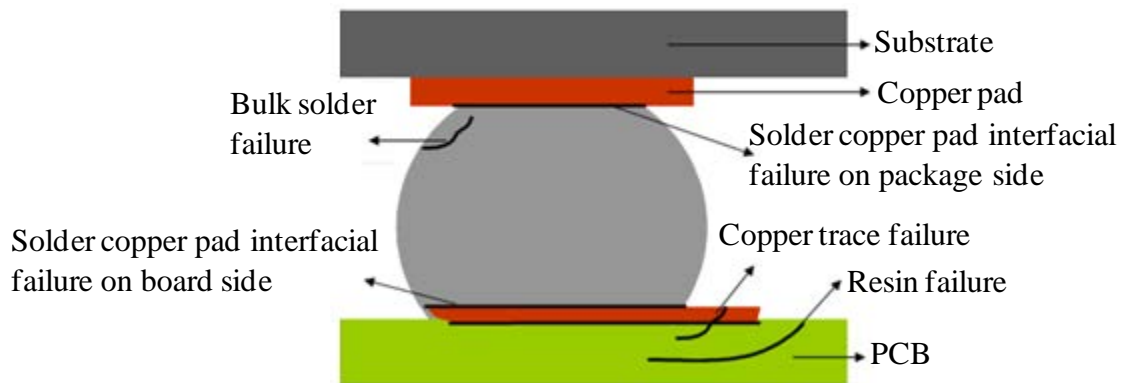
Types of failure mode across solder joint in drop/shock event
